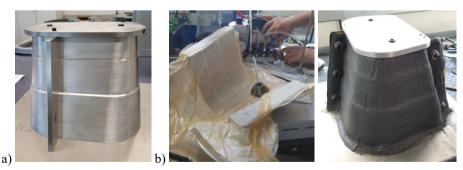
Mould (a) and counter mould (b) used for the manufacturing of the PURE and hybrid specimens.
